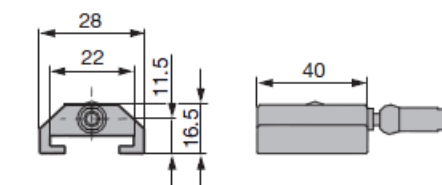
Installation dimensions of BTL5-T-2814-1S magnet
